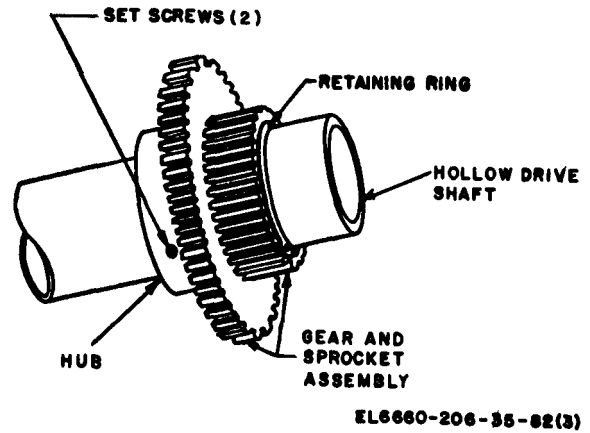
(3) Antenna scanner assembly, disassembly and reassembly (sheet 3 of 5).
